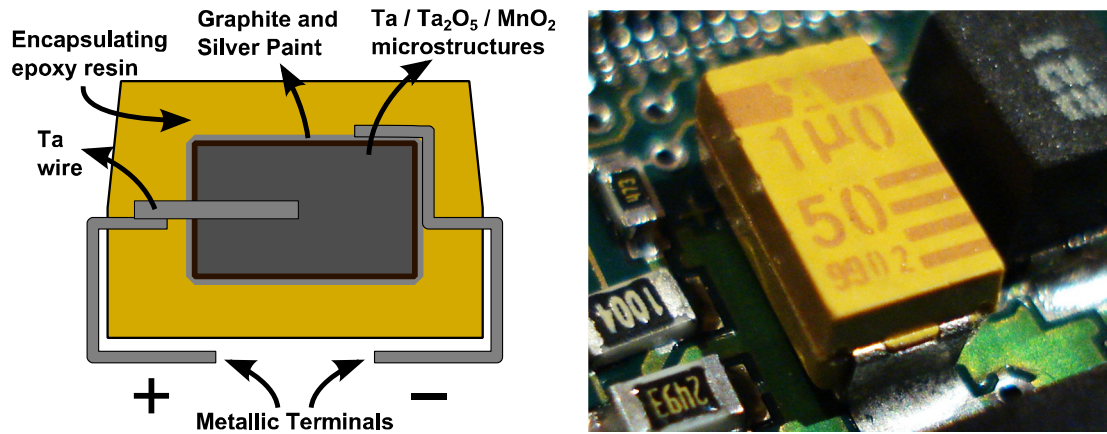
Cross-section view of a tantalum solid electrolytic capacitor (at left) and a picture of a capacitor welded into a PCB.
